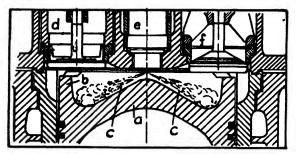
SHOWING SECTIONAL VIEW OF A CYLINDER HEAD FOR DIRECT INJECTION ENGINE
